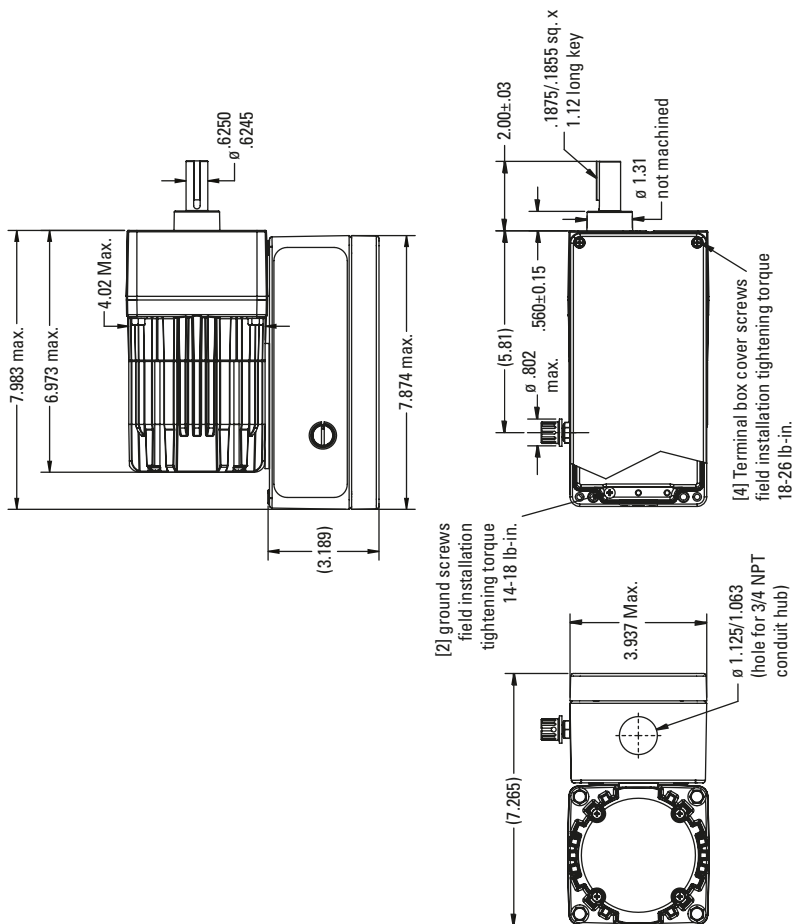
Standard 34B/SR-WX Mounting Dimensions
